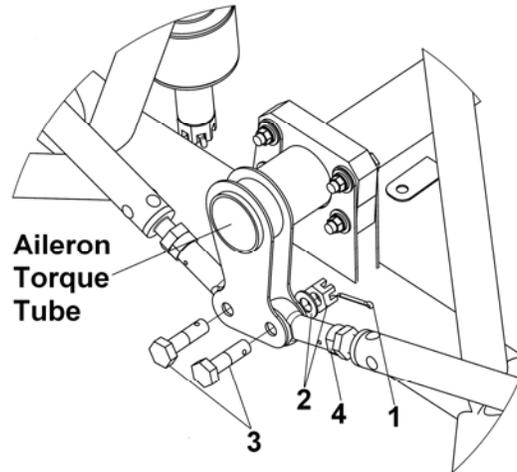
Aileron Inboard Pushrod to Torque Tube
